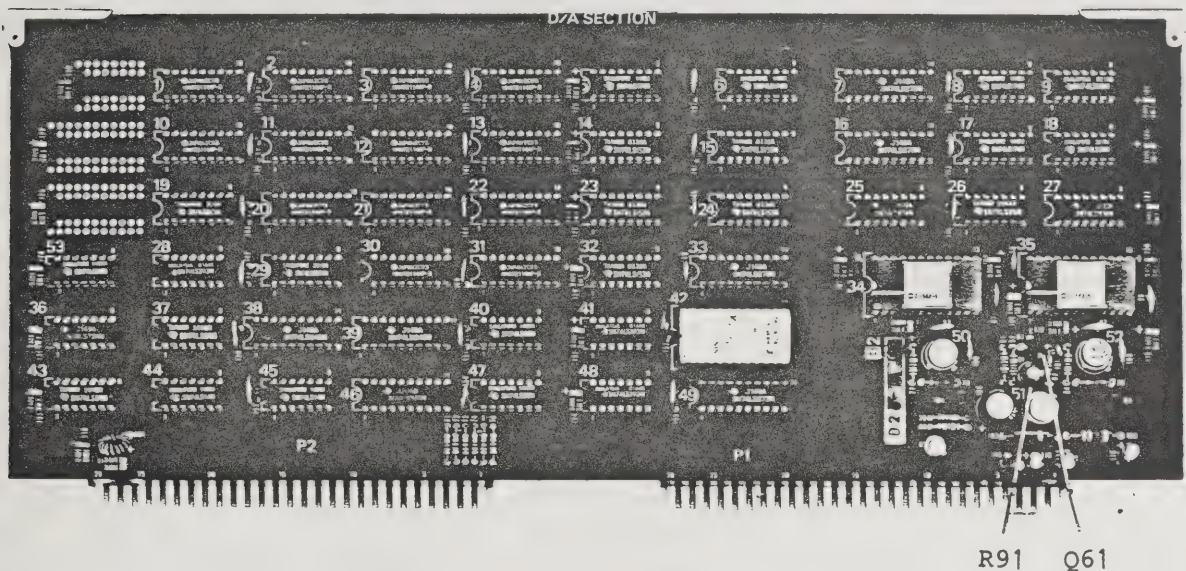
Adjustment on the D-A converter board (BGP-010188)
